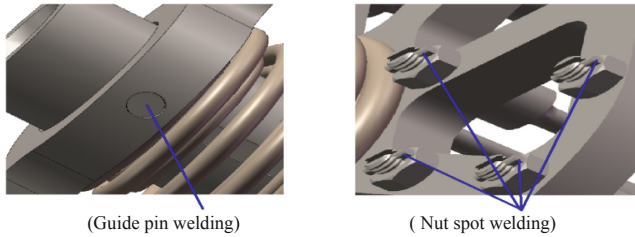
Schematic diagram of the welding process design of thimble plug assembly
